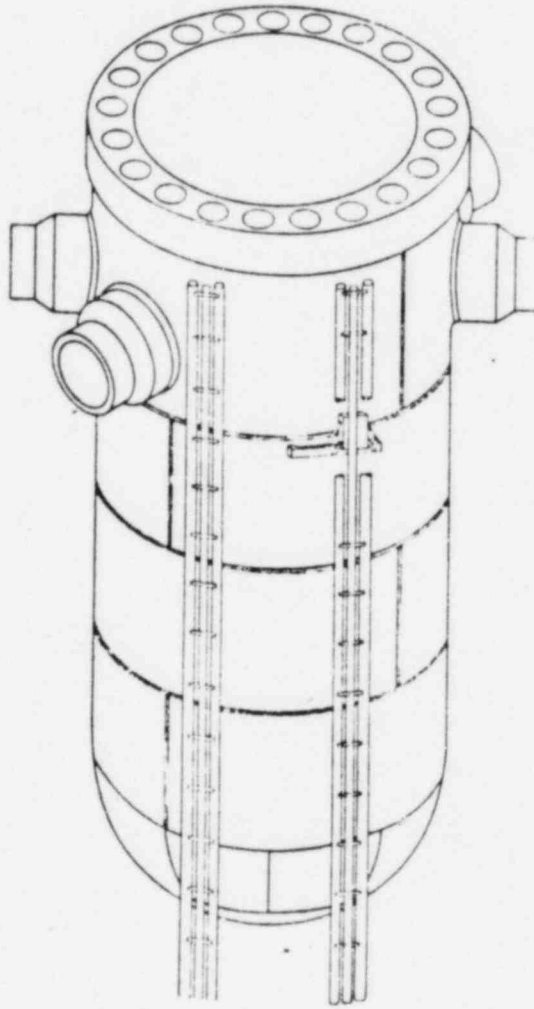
Schematic Drawing of Location of Tracks on RPV and Operation of the Remote-Controlled Inspection System.
